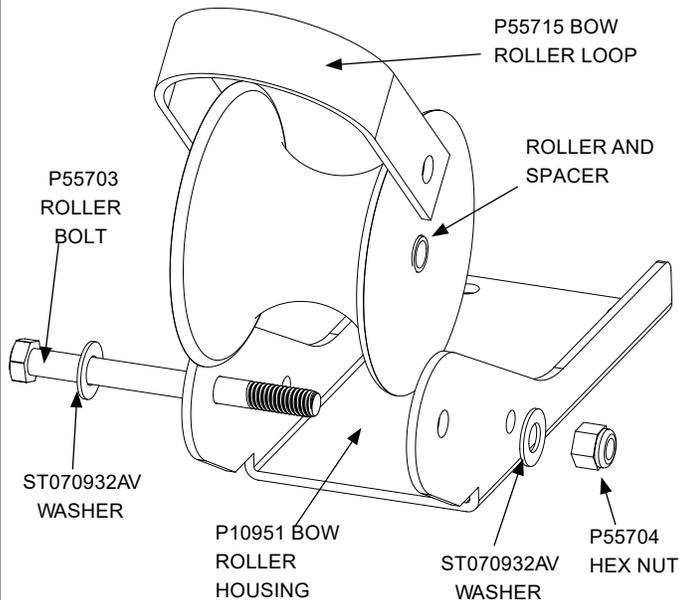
ASSEMBLING ROLLER INTO HOUSING
